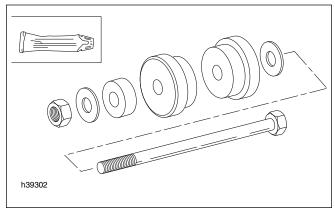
Steering Head Bearing Race Installer (HD-39302)
